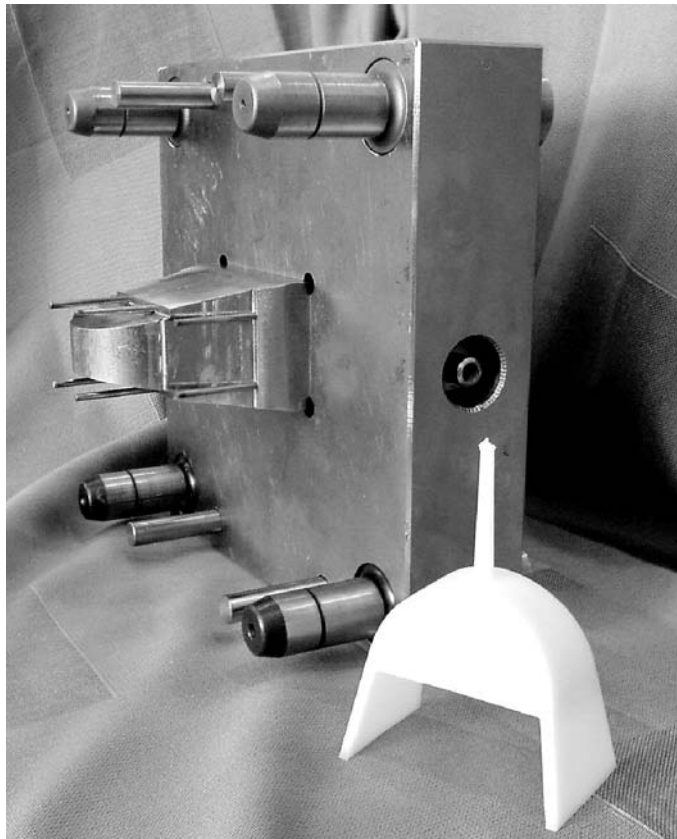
Machined insert, with conformal cooling, used in the modular tool
